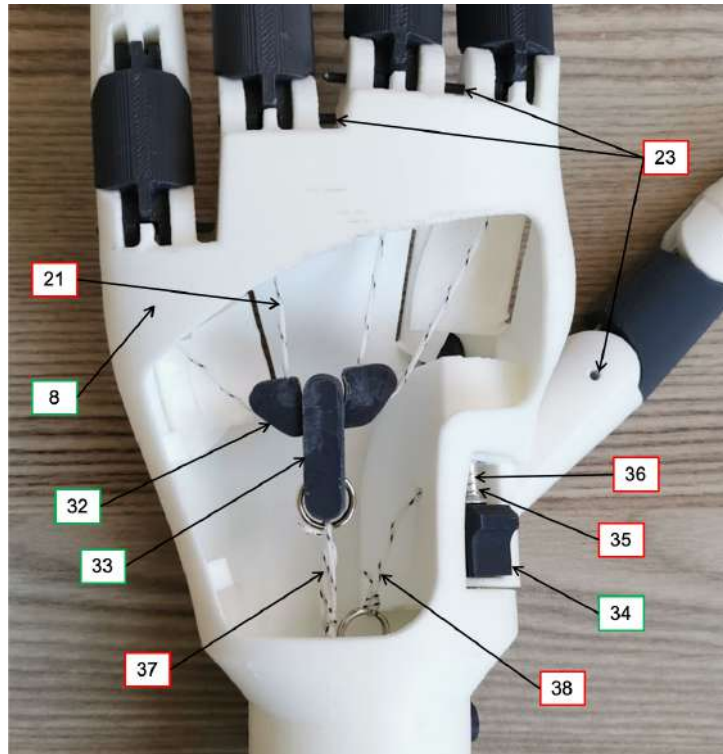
Labelled top view of the components housed inside the palmar space of the ADL arm V2.
